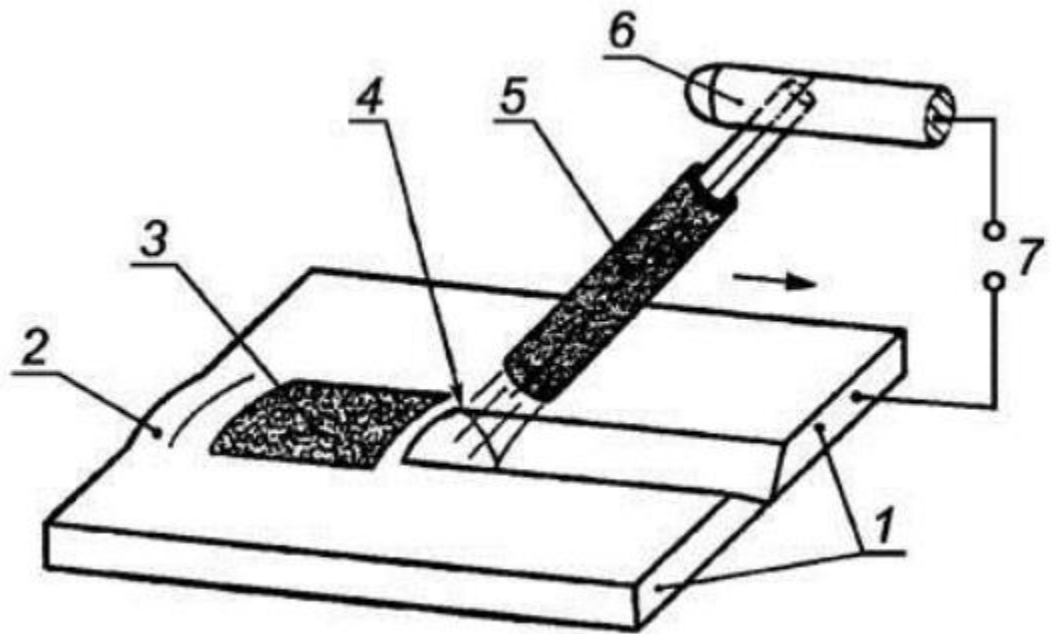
Scheme of manual arc welding with coated electrodes
